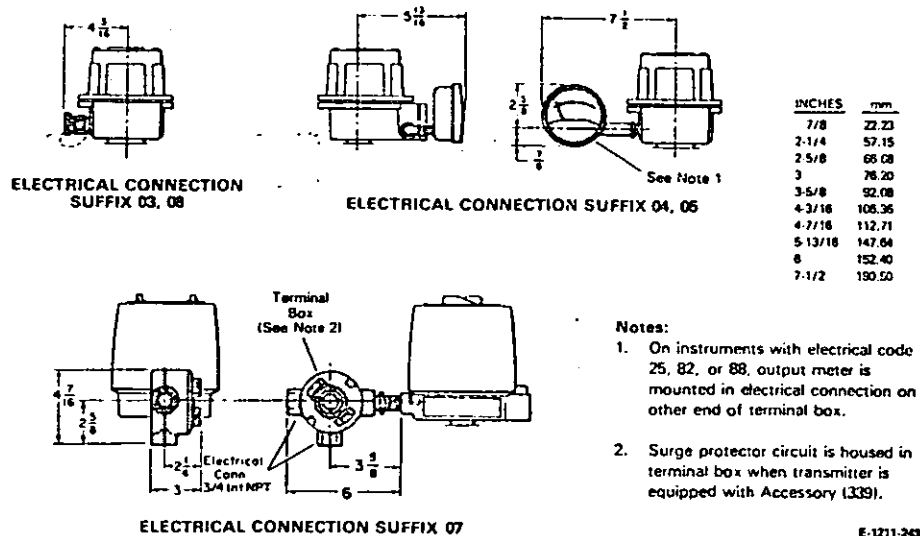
Mounting Dimensions for Electrical Connection Suffix 03 through 08
